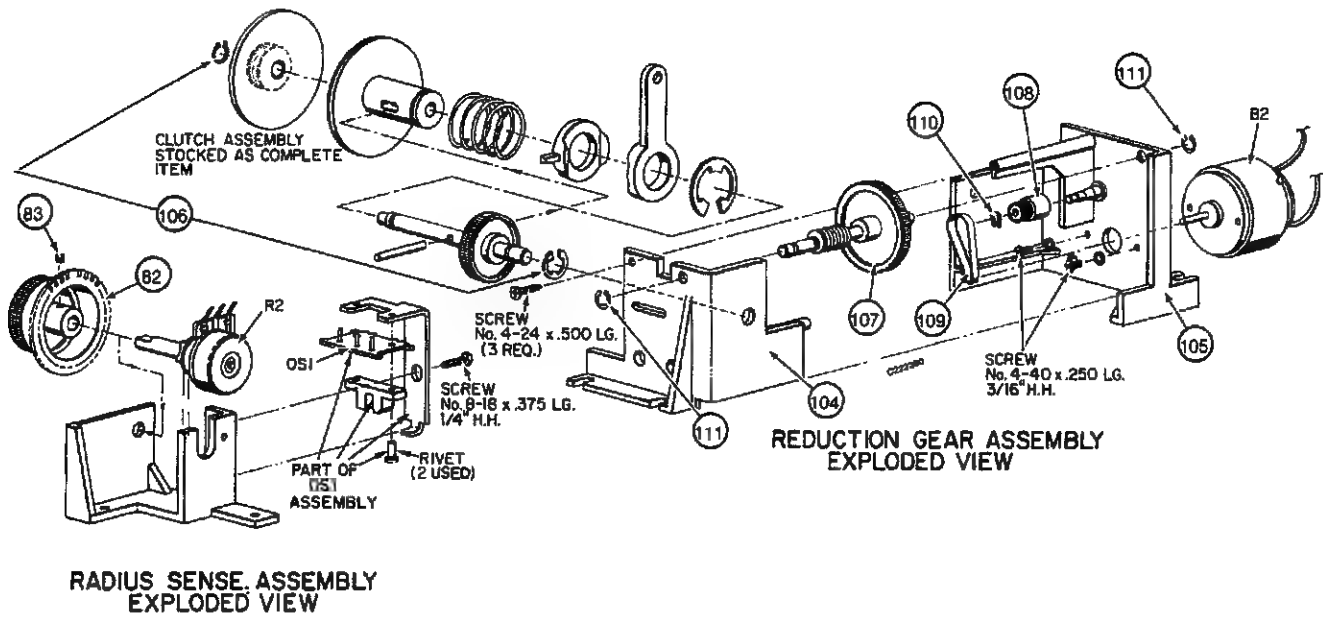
Radius Sensor And Reduction Gear Assembly Exploded View
